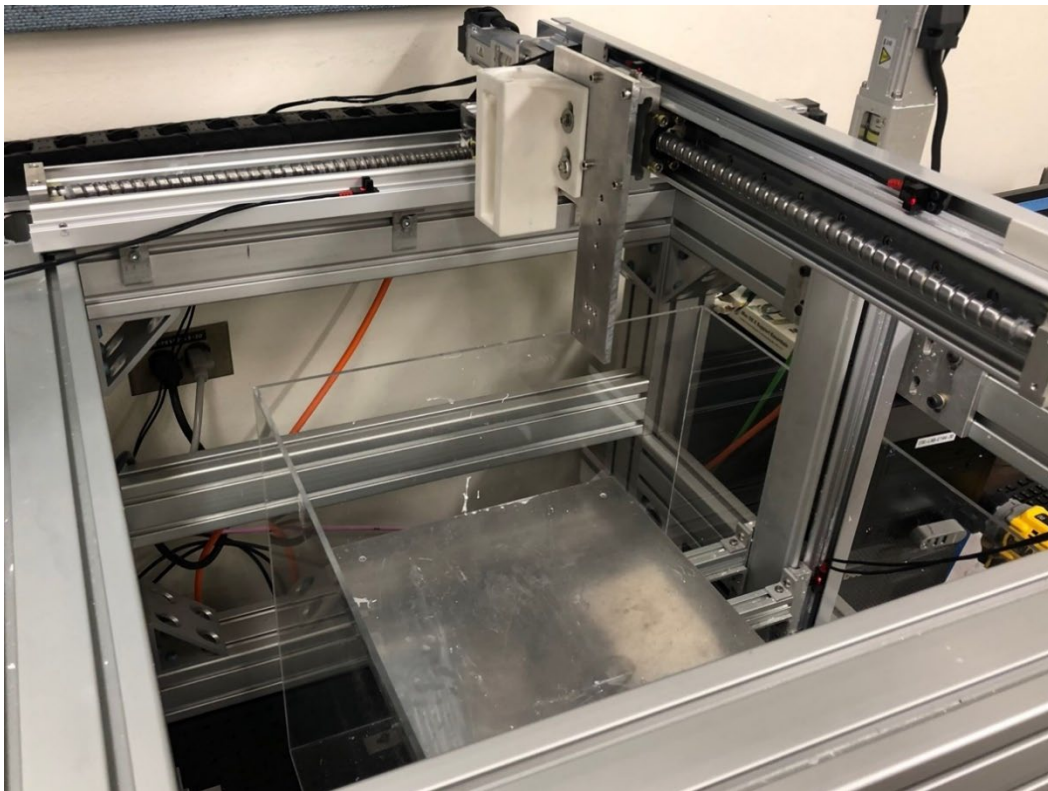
Assembled physical printer displaying motion subsystem and the build plate.
